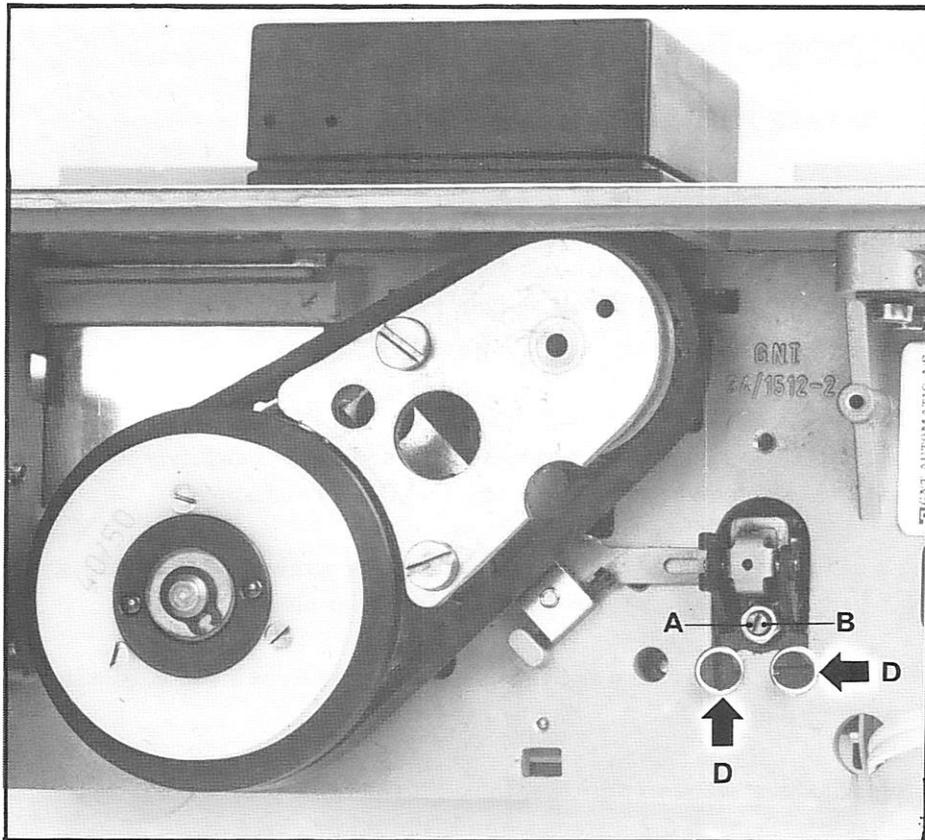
Clutch Magnet, Adjusting Screw Locations
